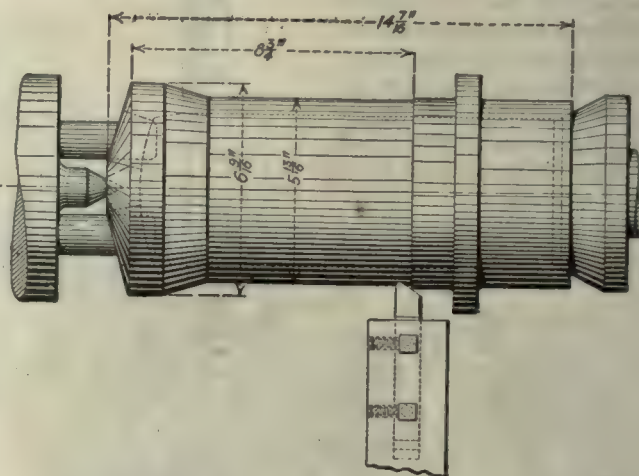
SHOWING THE MATERIAL CUT AND SET-UP USED IN TESTS
